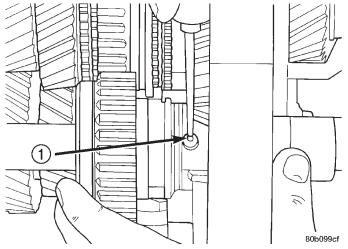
Depress Pin In Reverse Idler Gear Shaft
